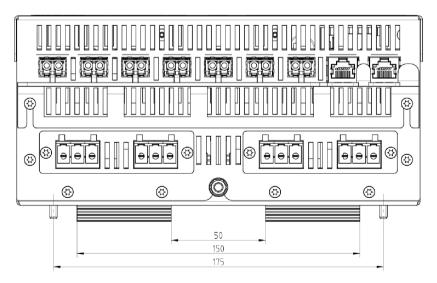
Dimension drawing IE Switch X302-7EEC - from above
